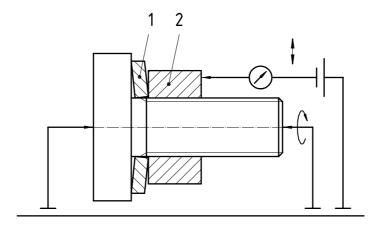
Gauge for verifying position tolerance specified in Figure 77
